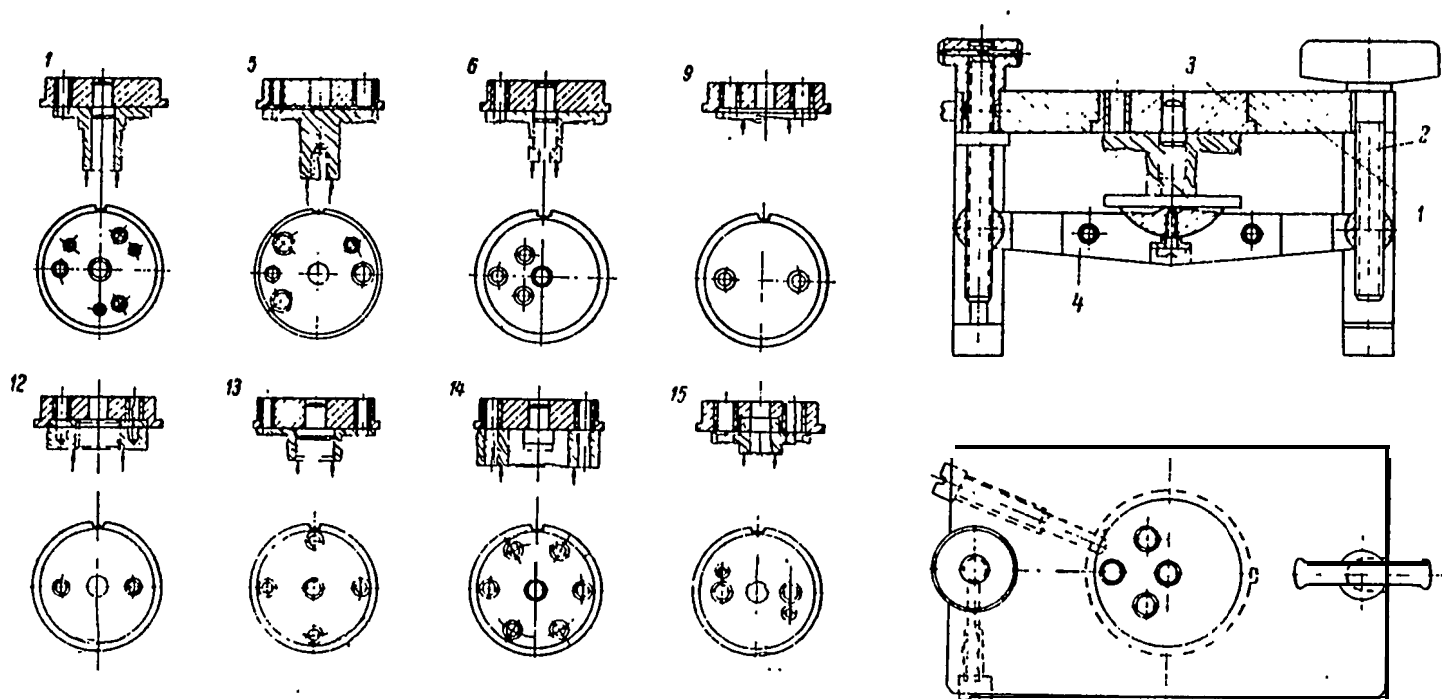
, Example of a group drill jig and adapters used for drilling 8 different parts in a part family
